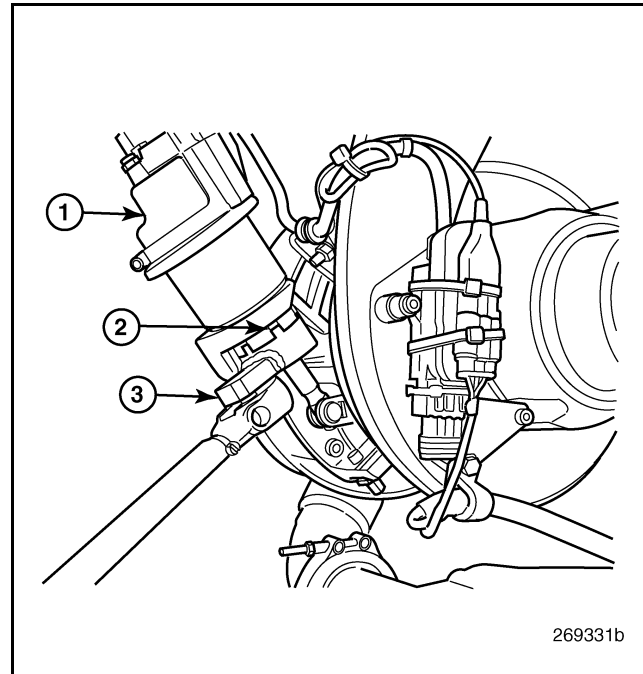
Using Spanner Wrench to Tighten Spanner Nut
